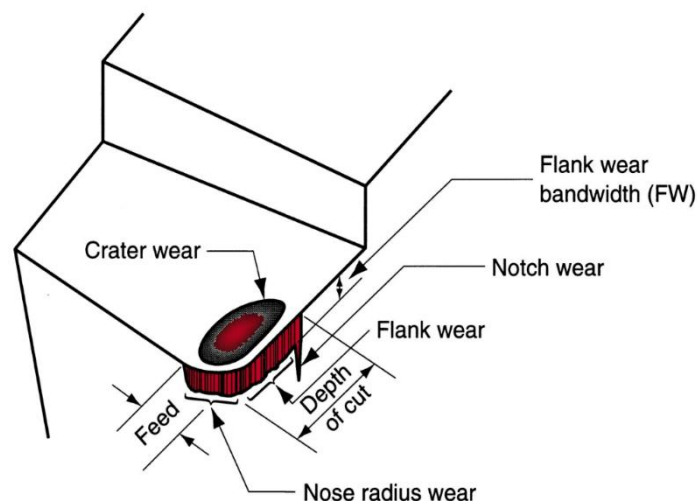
Worn cutting tool, showing the principal location of flank wear and crater wear [2013Akh]
